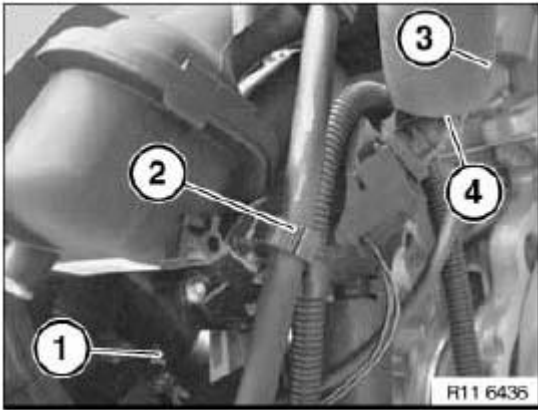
Identifying Plug Connection, Crankcase Breathers And Holders
